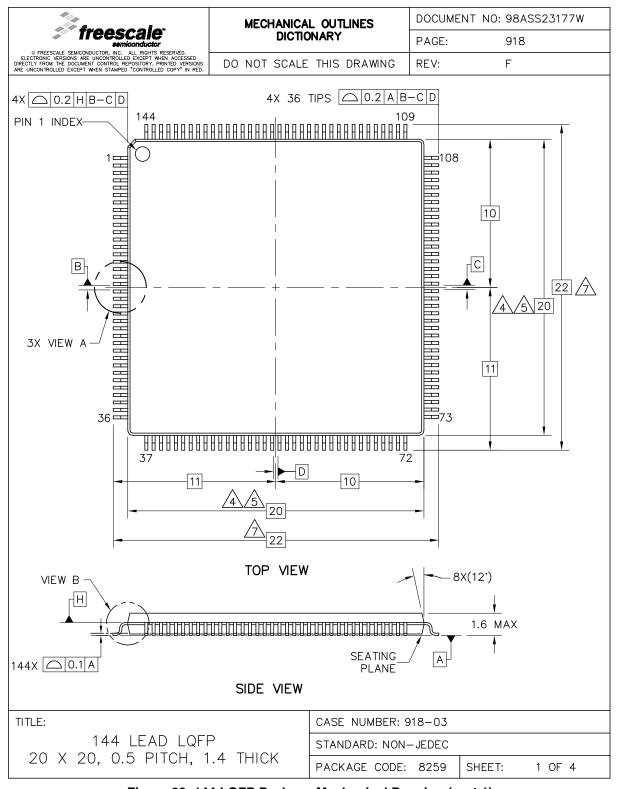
144 LQFP Package Mechanical Drawing (part 1)
